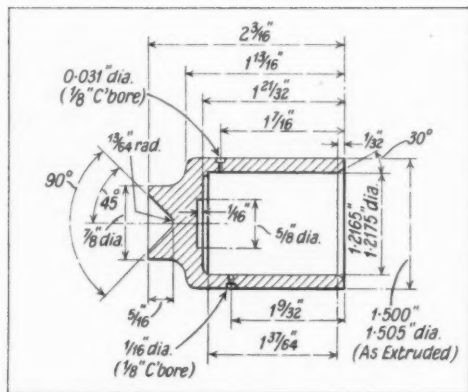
The External Surface of this Aluminium Piston Sleeve is Finished at the Extrusion Operation. The Bore is Machined to Close Limits After the Open End has been Bored
